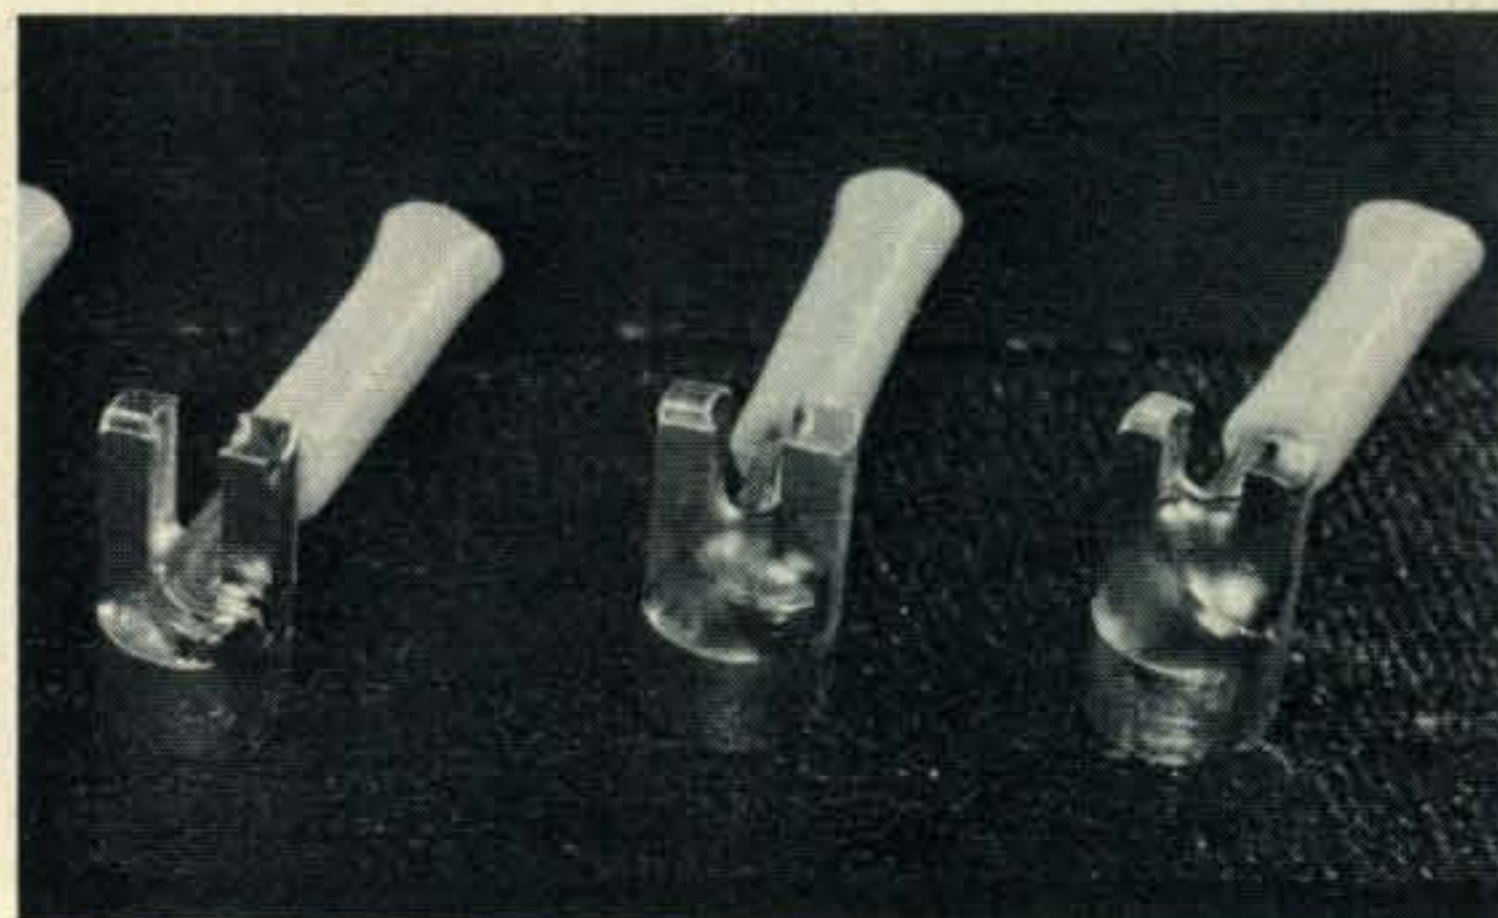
Bifurcated solder lug. (L) Too little solder; (R) Too much solder; (C) Correct.
